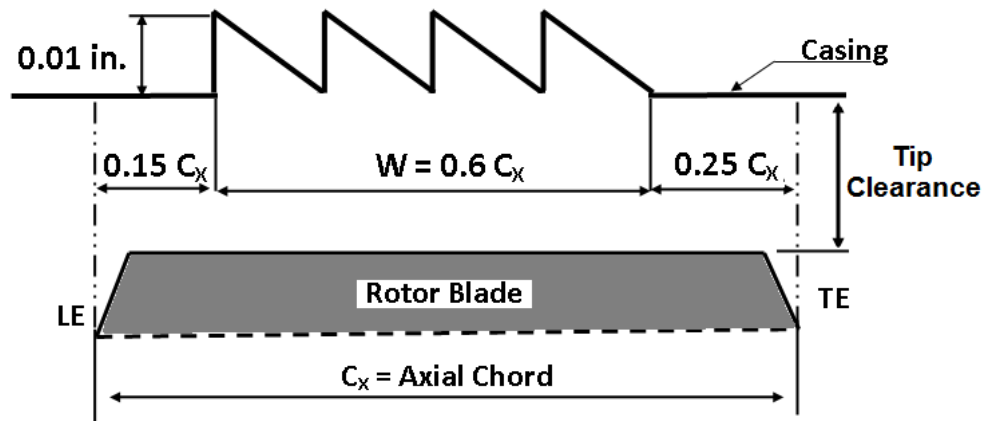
Cross sectional view and the dimensions of the final casing indentation design
